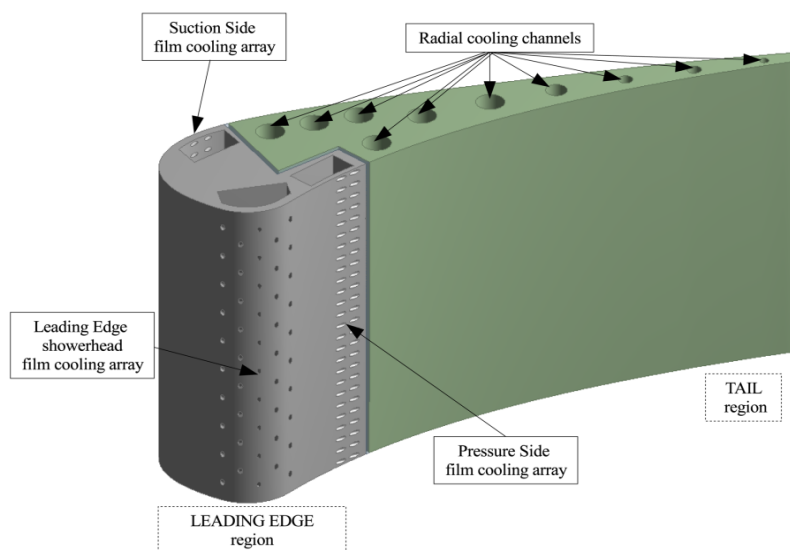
(b). Cad model of film cooling holes in turbine blade [3]
